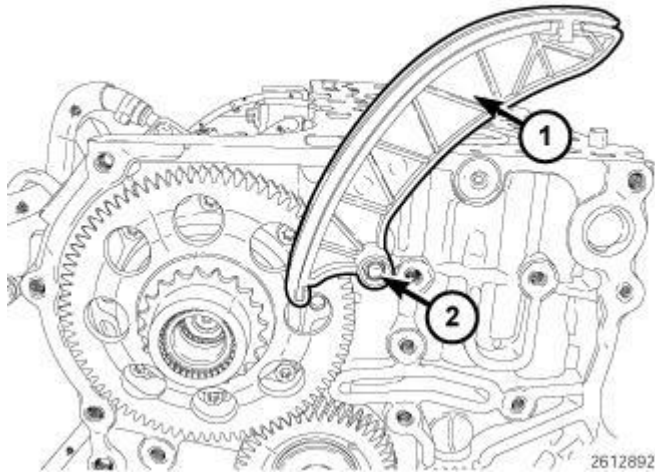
Extractor Bolt Tool & Timing Guide Pin
